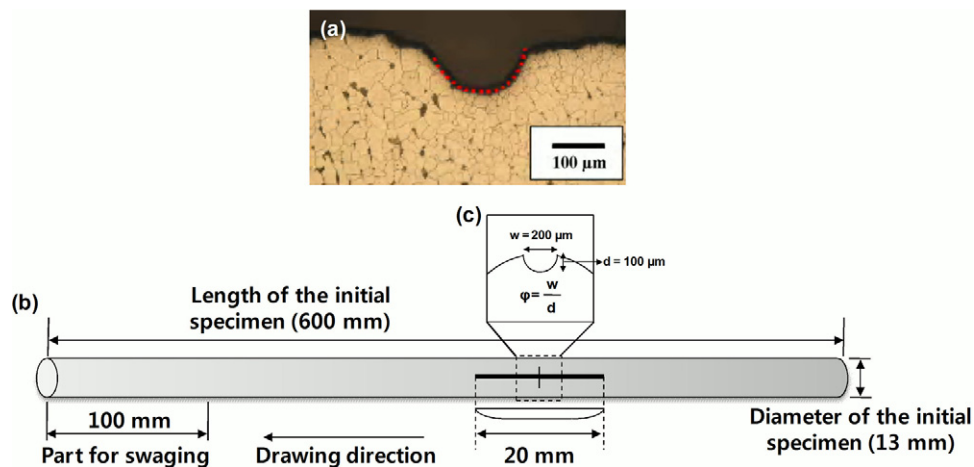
Schematic diagram of the initial surface defect and specimen: (a) surface defect represented in the literature (Kwon et al., 2009), (b) the specimen with an artificially introduced longitudinal round-type defect, and (c) a cross-sectional view of the round-type defect.
